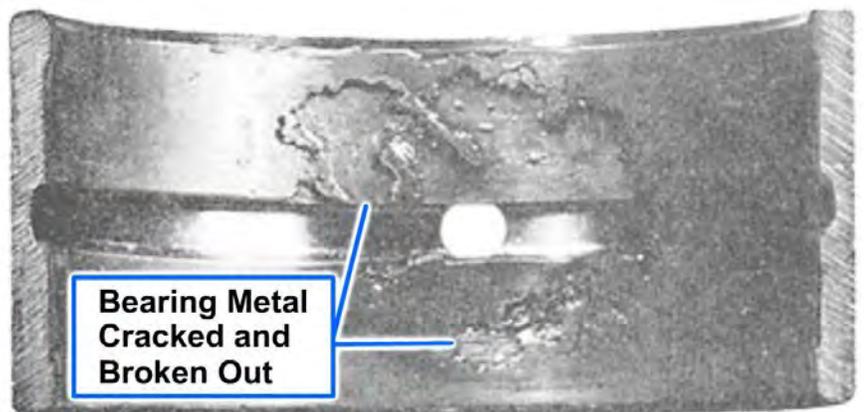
Bearing failure due to inadequate bond.
